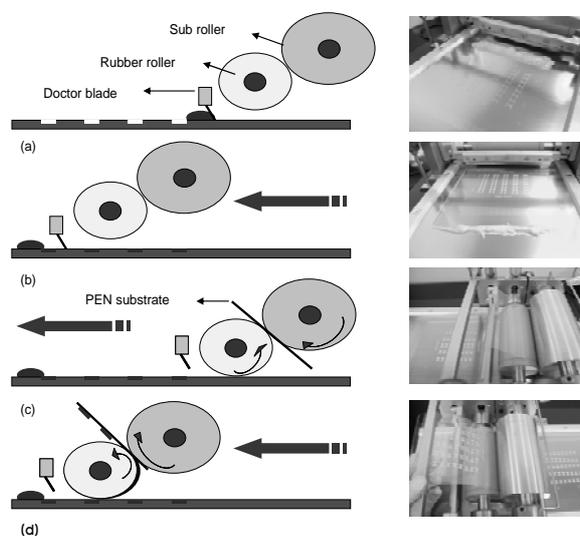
Fabrication of printed electrodes in printed OTFTs using flexo printing: (a) pure Ag paste onto engrave plate (b) spread and inking on plate using doctor blade, (c) inserted plastic substrate between sub roll and rubber roll, and (d) roll printed electrode on plastic substrate.
